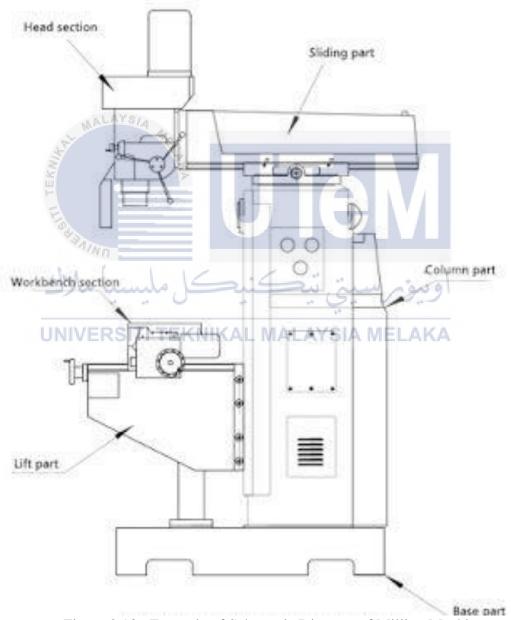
Example of Schematic Diagram of Milling Machine
